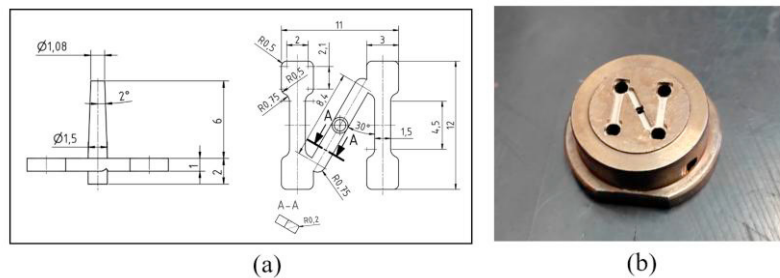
Specimen design (a) [18] and mold insert, ejection side (b)
